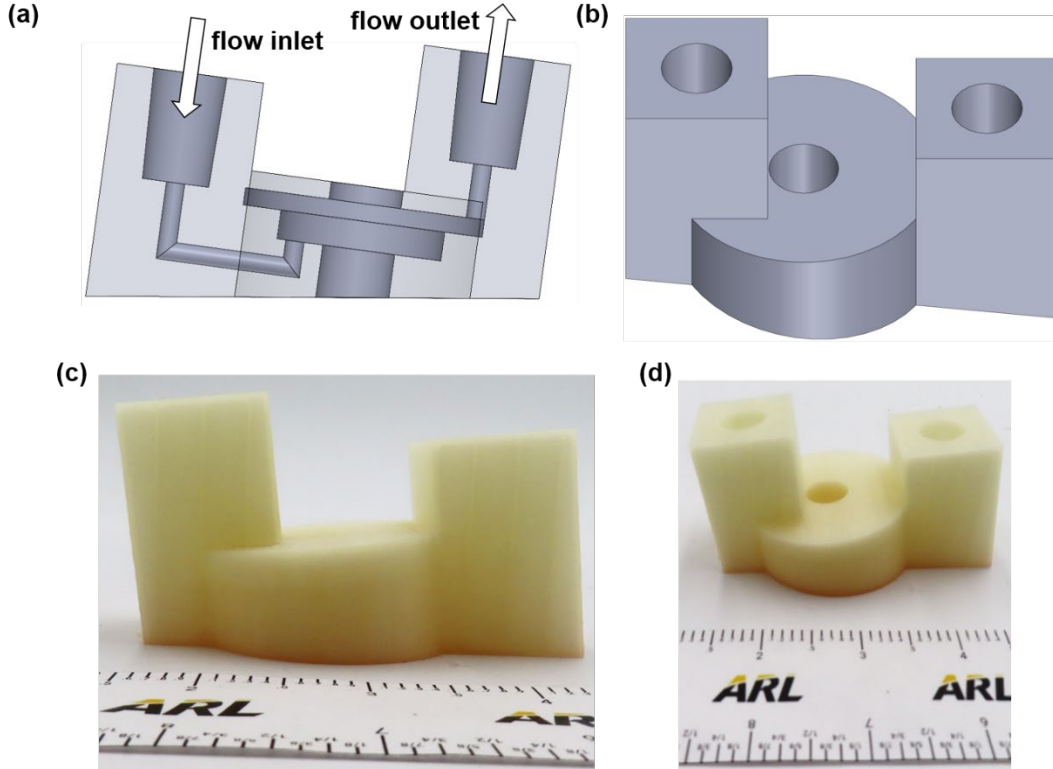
Gladhand seal mold. (a) CAD model side view with transparency, (b) CAD model at an angle, (c) 3D-printed mold side view, and (d) 3D-printed mold at an angle.
